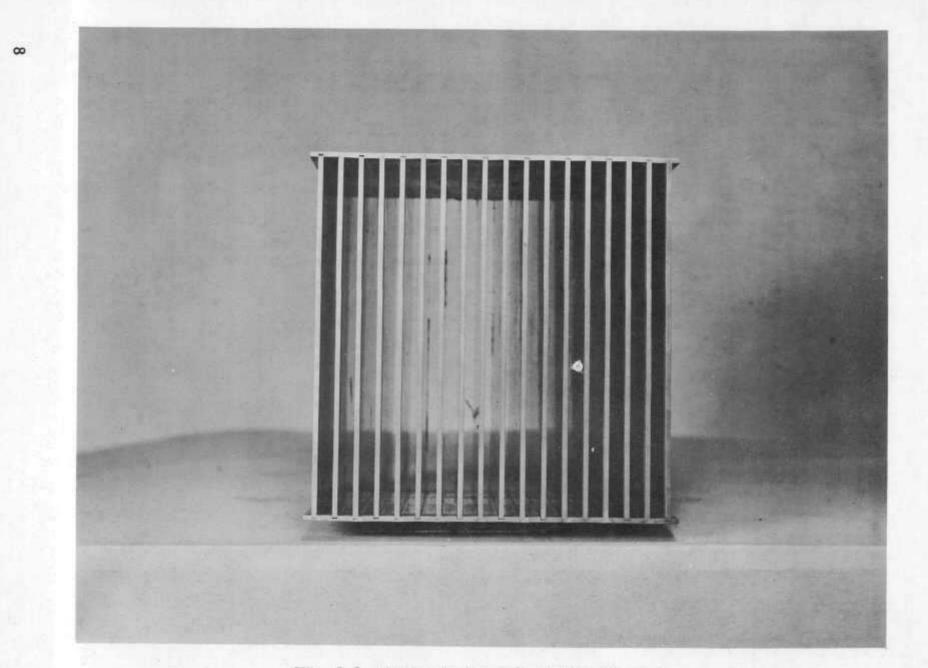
Segment of T. I. G. Welded Element
